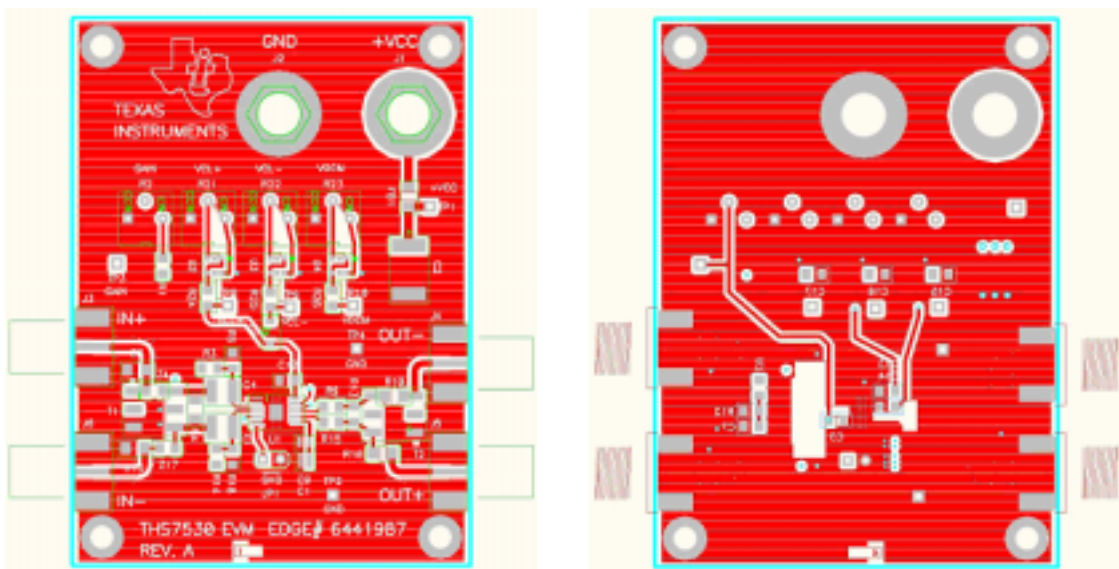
EVM Board Layout: Top (Left) and Bottom (Right)
